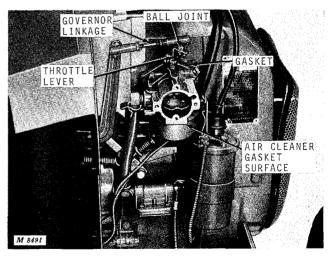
Installing Carburetor Assembly on Cylinder Block (K241AS Engine)
